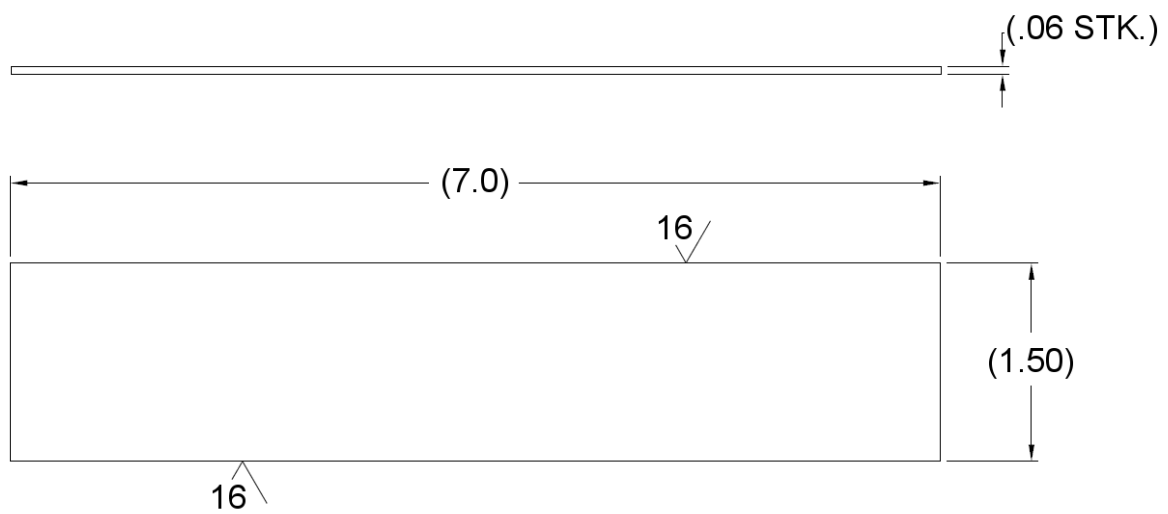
Dimensions of static test coupon after machining (dimensions in inches)
